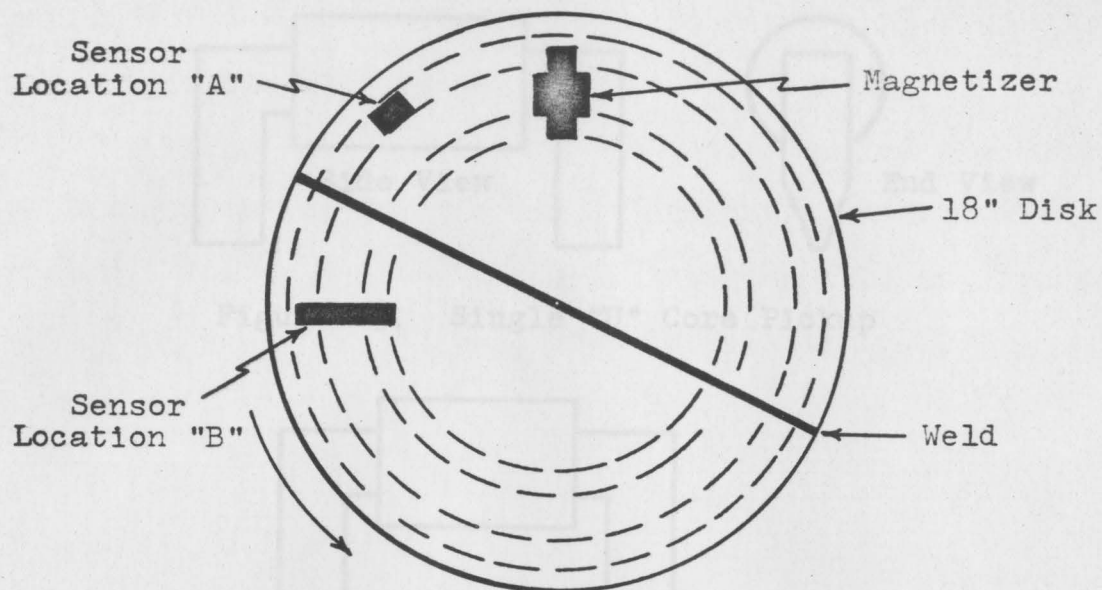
Relative Location of the Magnetizer and the Sensors on the Welded Rotating Disk
